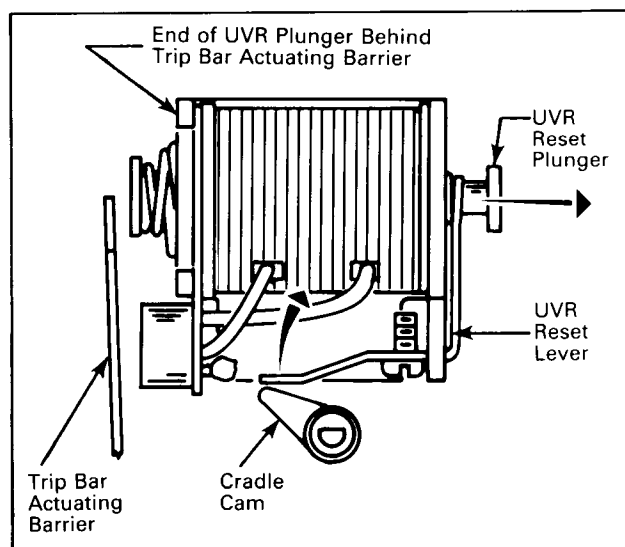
Sectioned View of Correct Position for UVR Reset Lever and Cradle Cam
